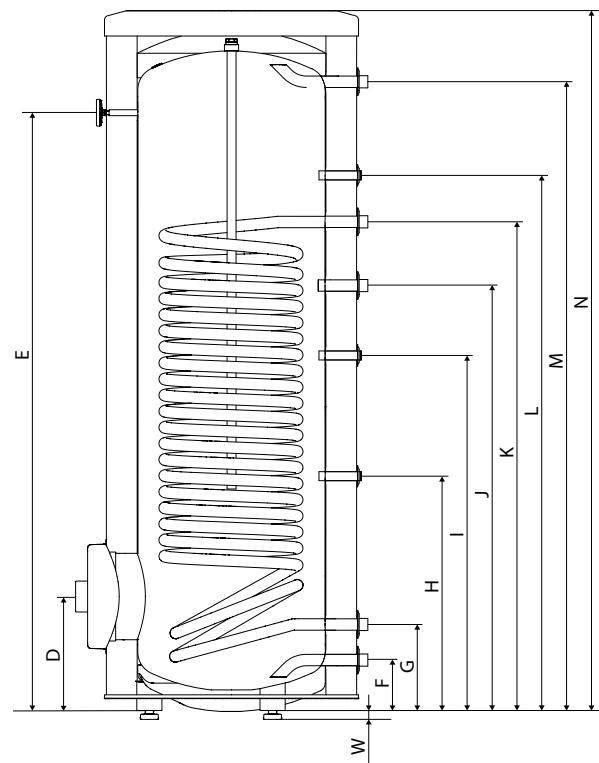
Dimensions of the BA-ST 3022/3030 - 1F storage tank
